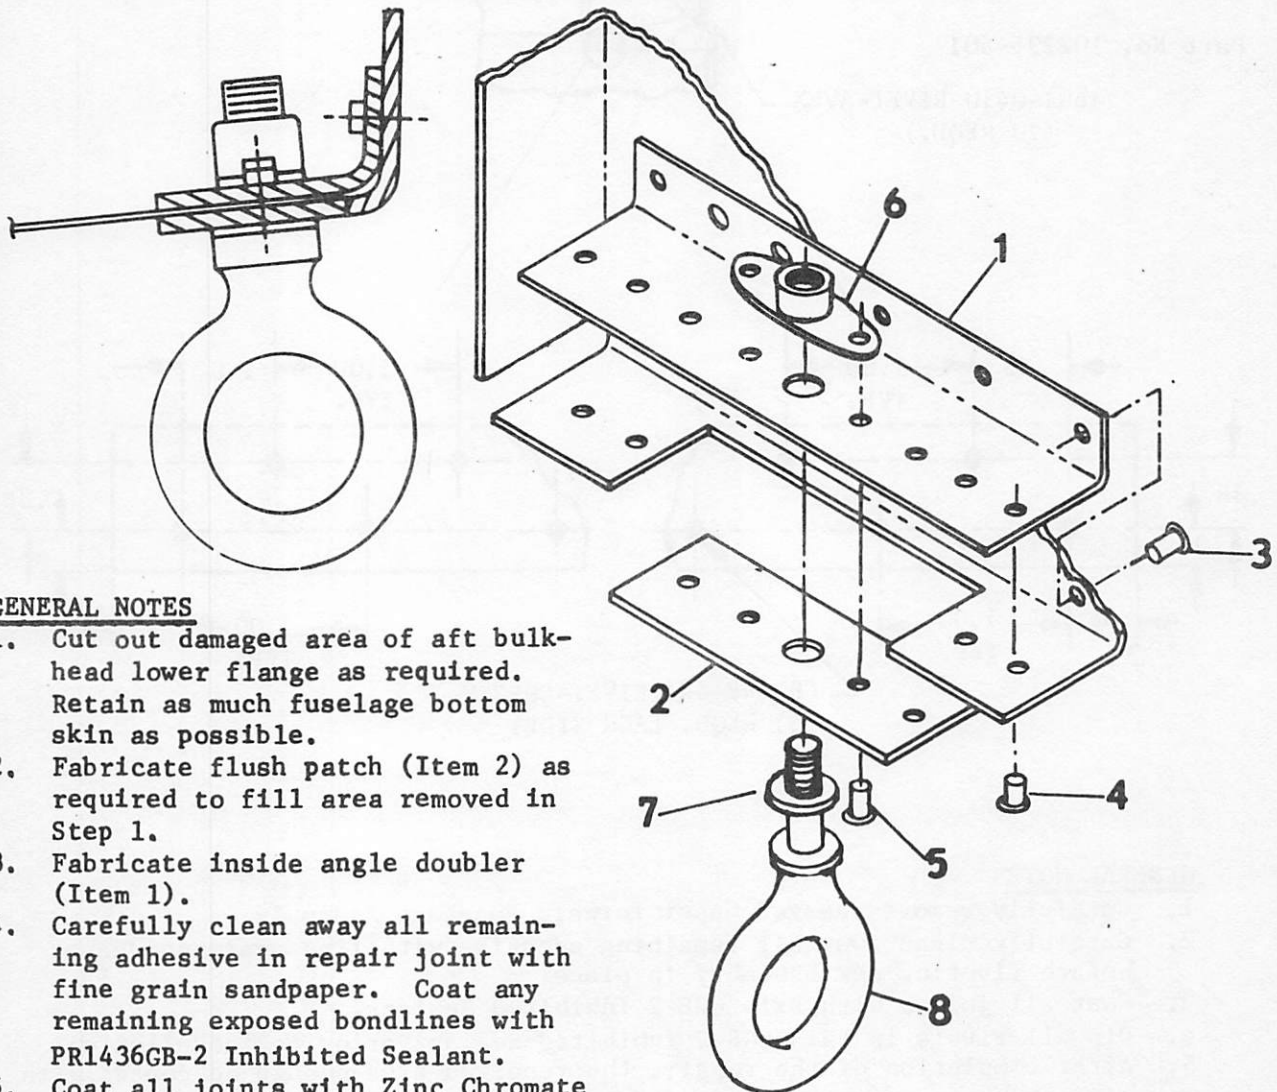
Aft Fuselage Bulkhead Replacement - Riveted
